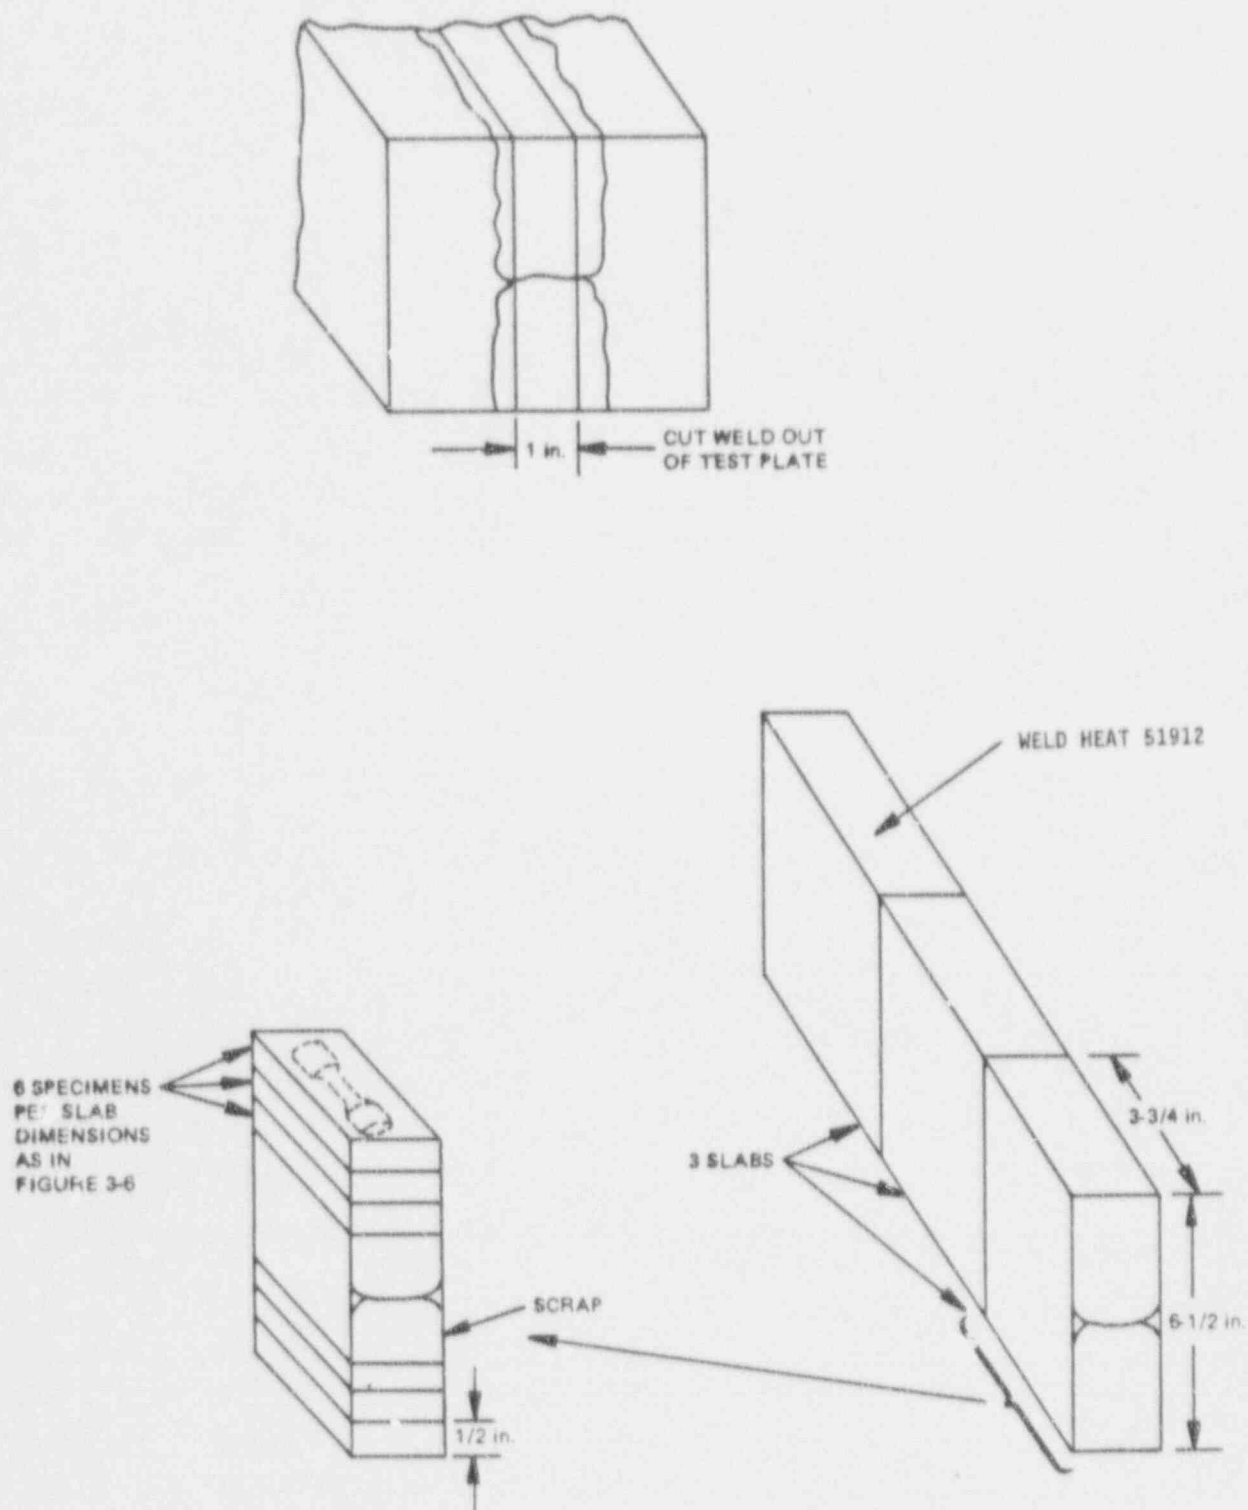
Fabrication Method for Weld Metal Tensile Specimens
